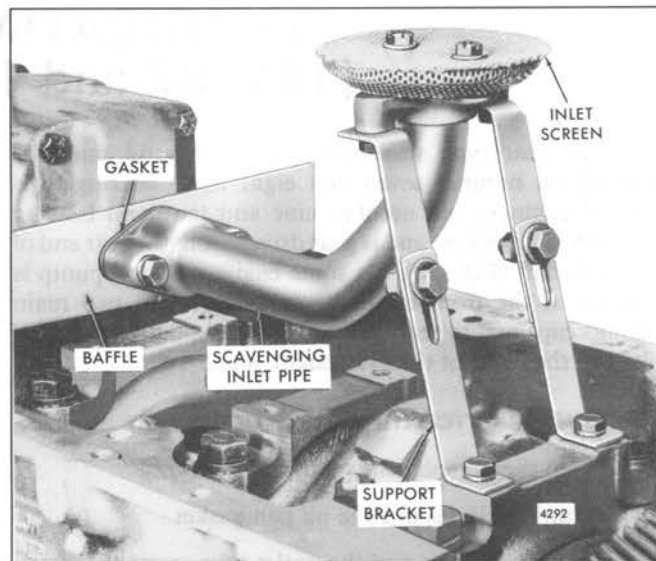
Scavenging Inlet Pipe and Screen Mounting
